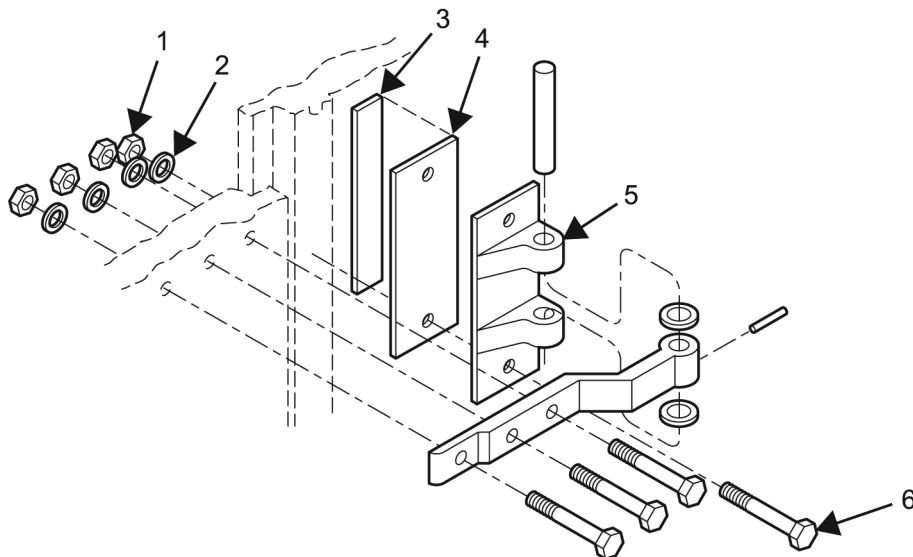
Adjusting the Weather Gasket Seal Pressure (Hinge Side).
